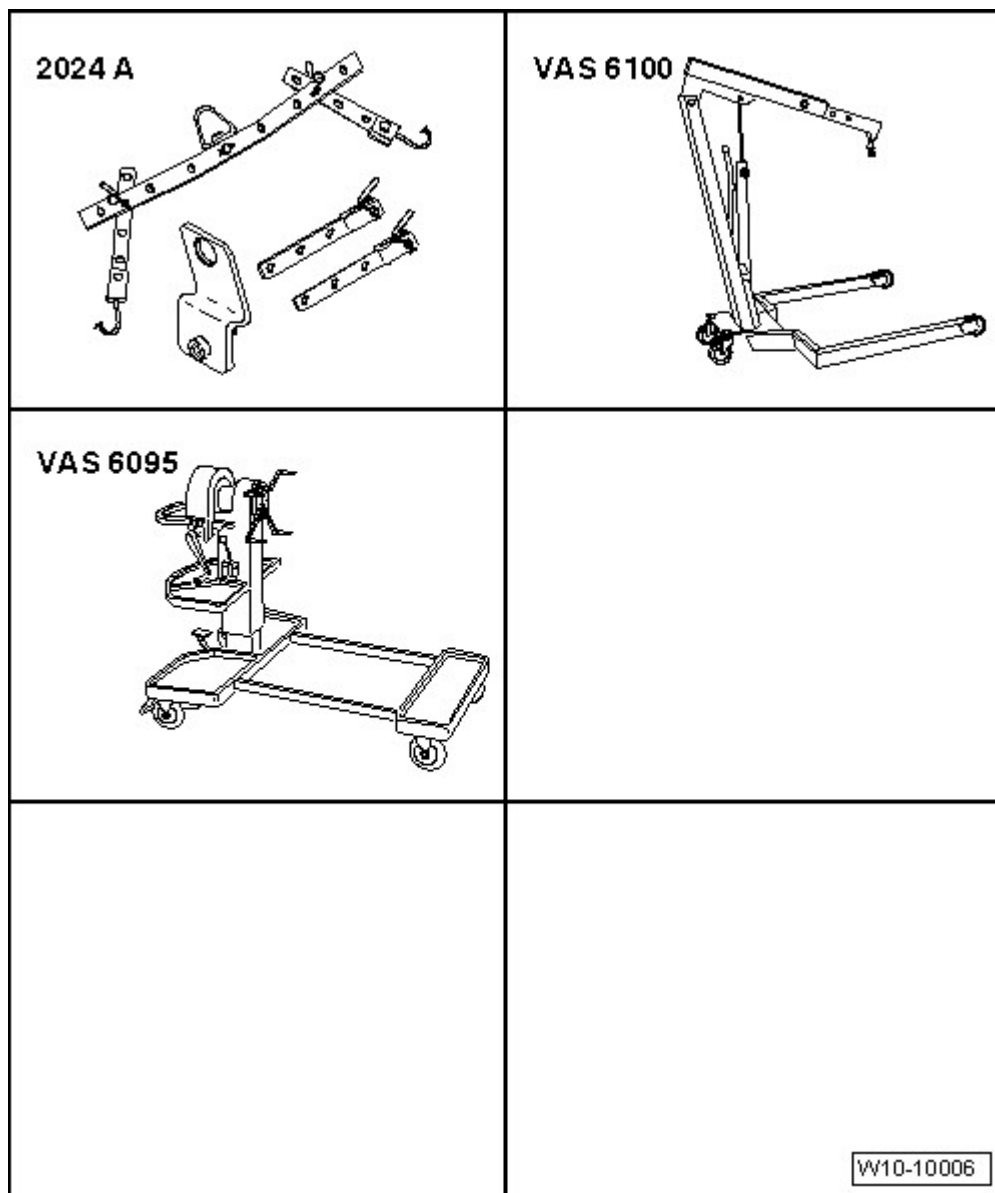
Identifying Special Tools -- Engine, Securing To Assembly Stand
